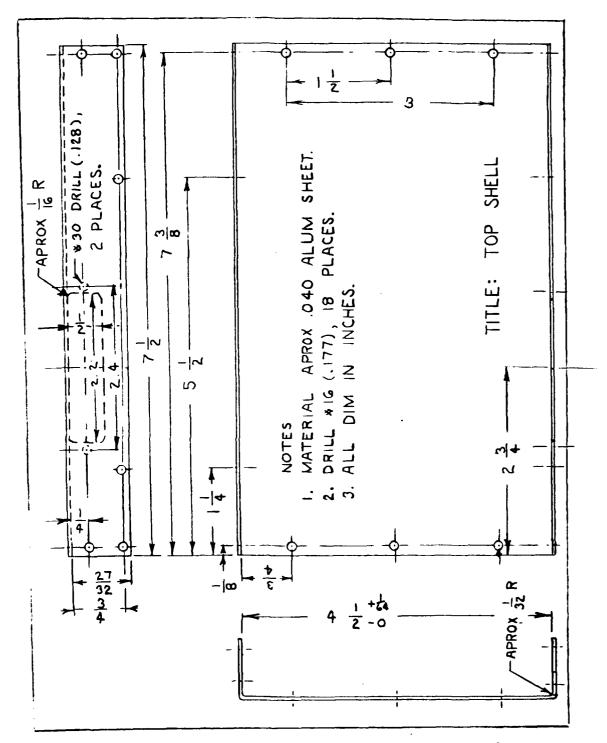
Flight Recorder Mechanical Drawings, Sheet 5 of 6
